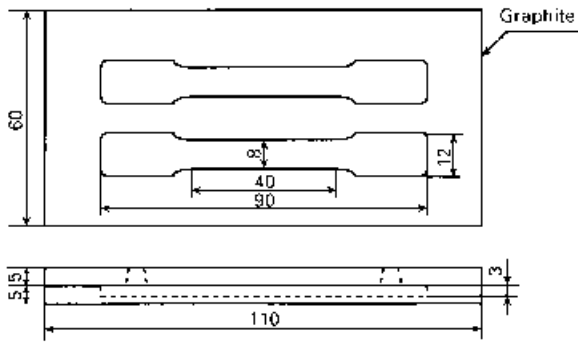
Shape and size of graphite crucible for making cast tensile test specimens. The dimensions are in millimetres.
